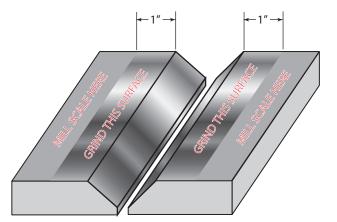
Grind mill scales off plates within 1 in. (25 mm) of the groove.
